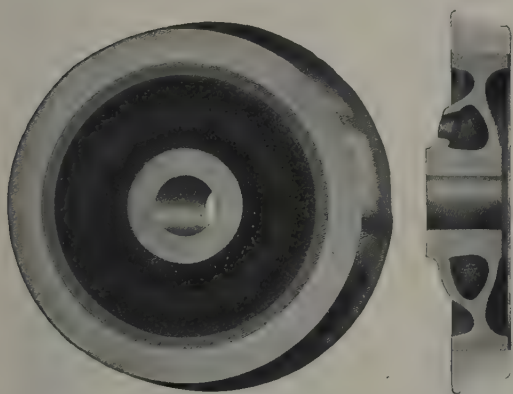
Cast Iron Plate Center with Tire Held by Shrinkage and Shoulder.
